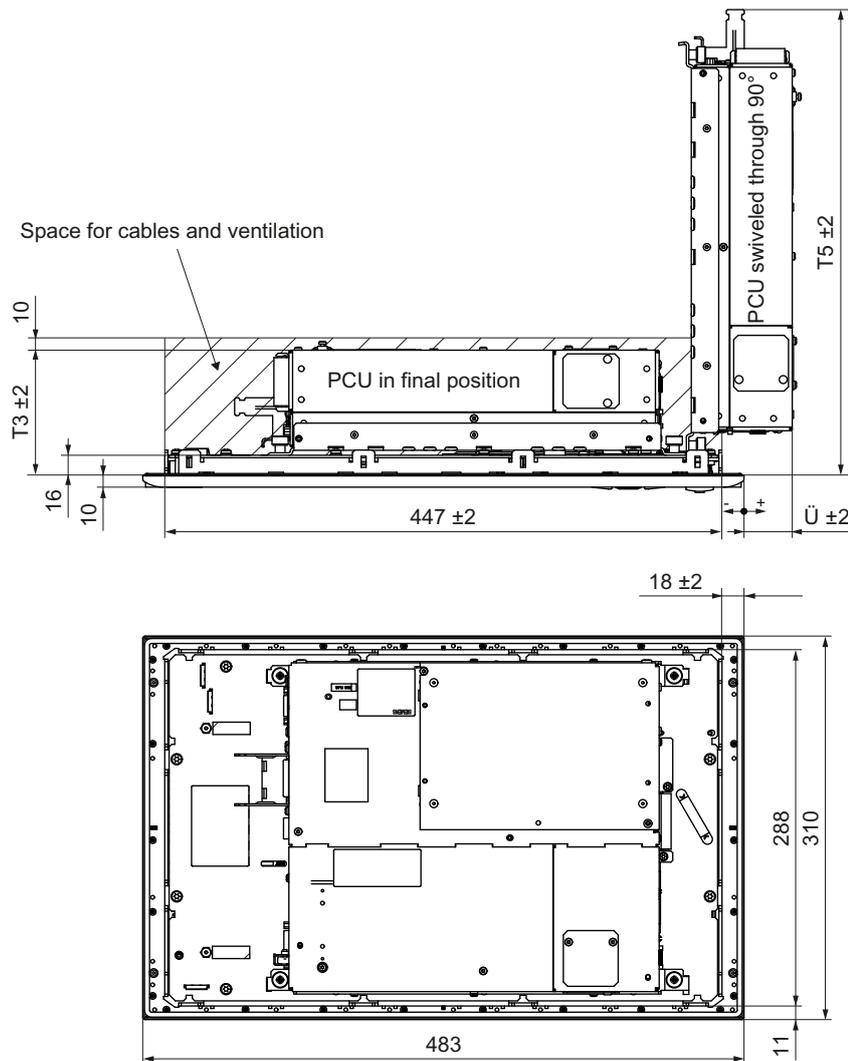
Dimension sheet for attaching the PCU to the OP 012 operator panel front
